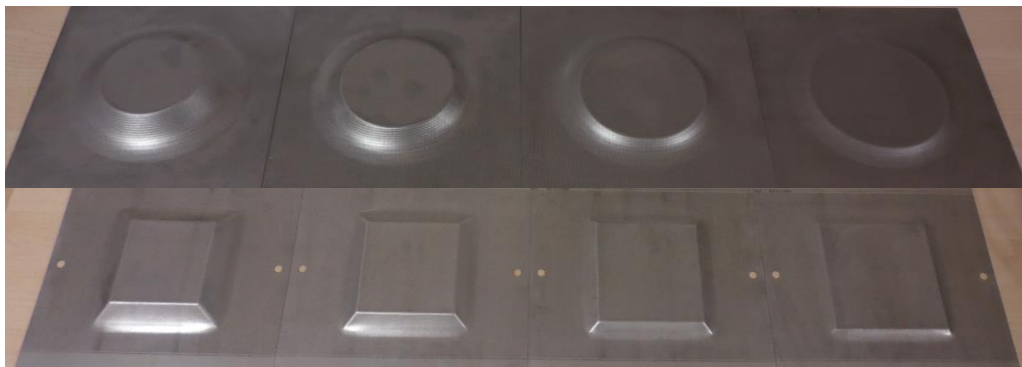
The formed parts with different depths manufactured by using 10 mm tool tip.
